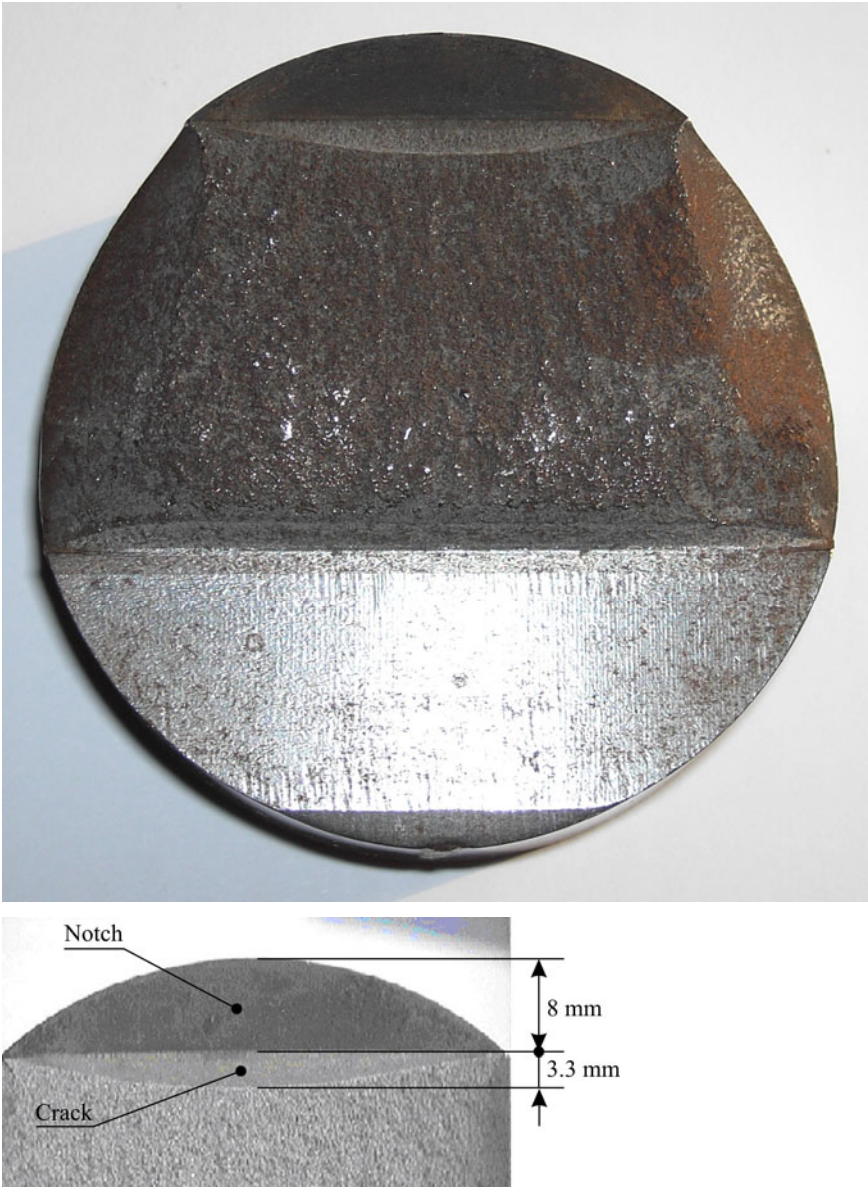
Particular of the disassembled central part of the rotor and of the crack highlighted by dye-penetrant.
